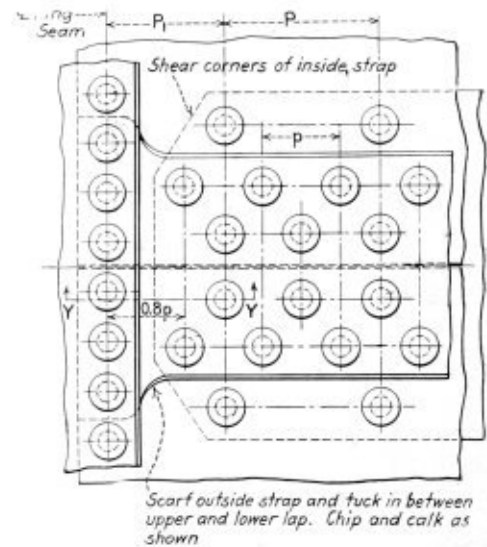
(b).—Inside Seam Construction of Double Butt Strap Joint
